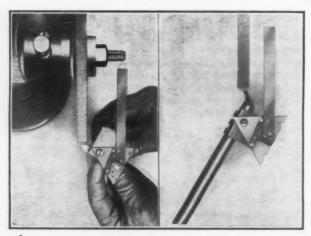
The Gauge Used for Sharpening a Threading Tool.
